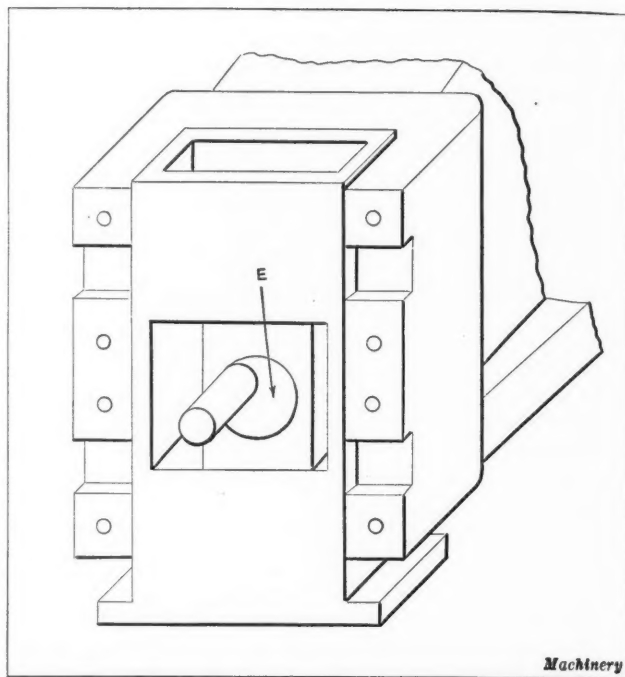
One Method of designing the Head End of the Frame and the Slide
